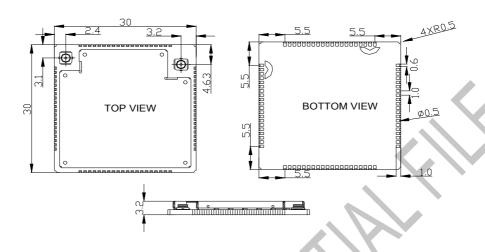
Dimensions of SIM908 ( Unit: mm )
